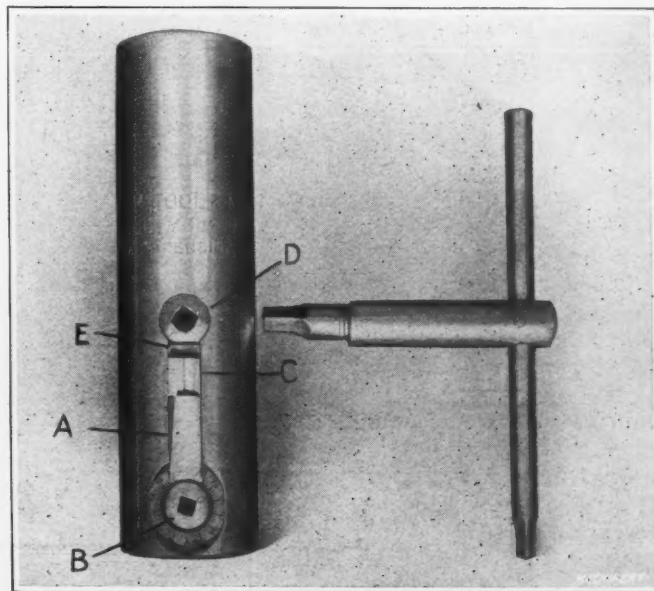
One End of Key turns Adjusting Screw and the Other End tightens Binder after Cutters have been set in the Desired Position
